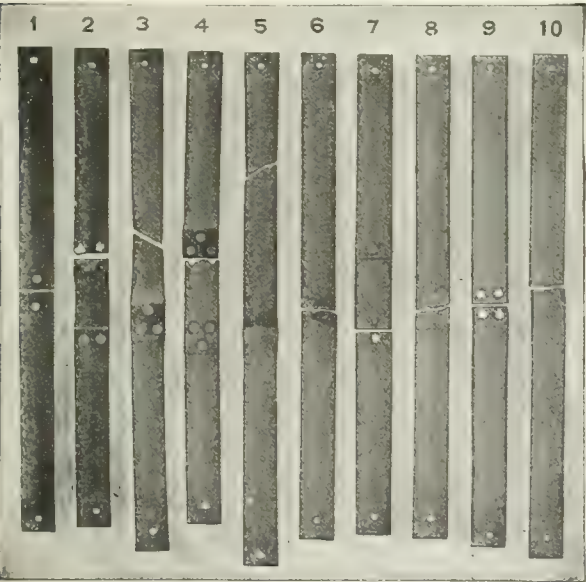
Convincing Tests of Electric Welding.
